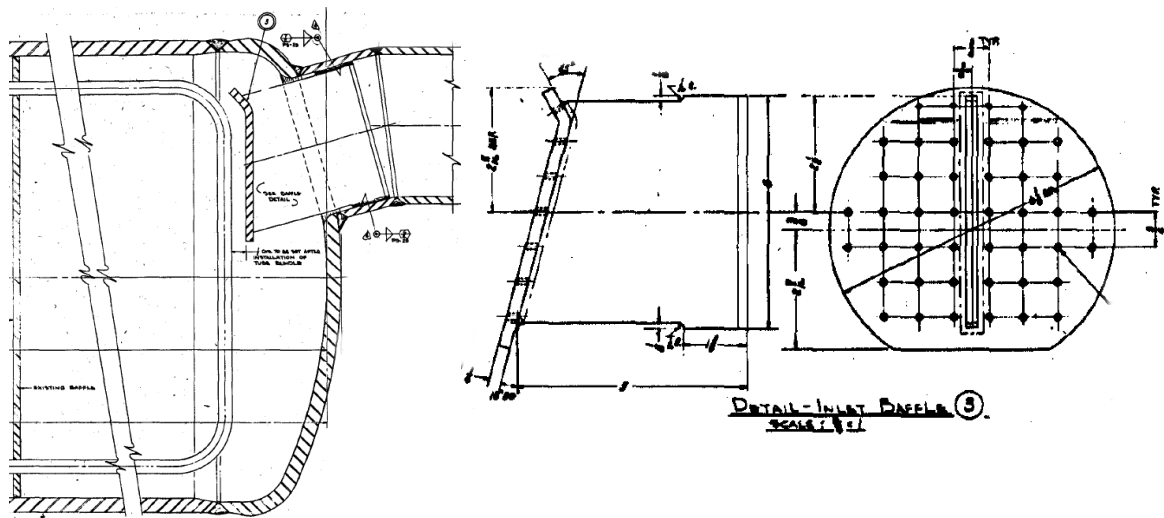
Technical drawing of the impingement baffle at fuel inlet (ORNL-TM-2098).
